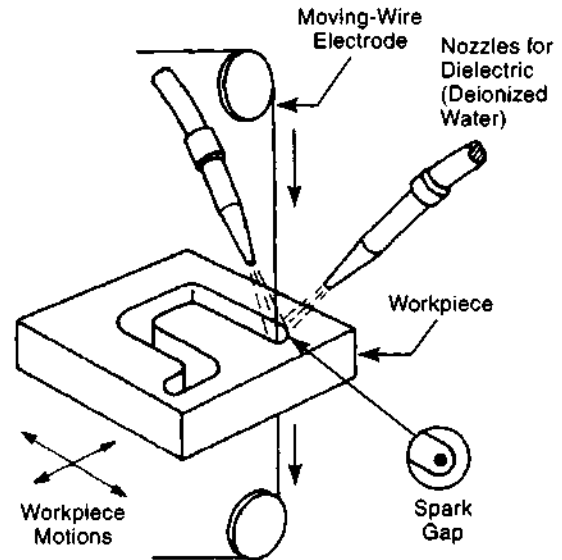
Wire EDM. Electrical sparks from the wire to the workpiece cut a contoured slit in the workpiece as the wire advances. (Courtesy American Machinist, Penton Media, Inc.)
